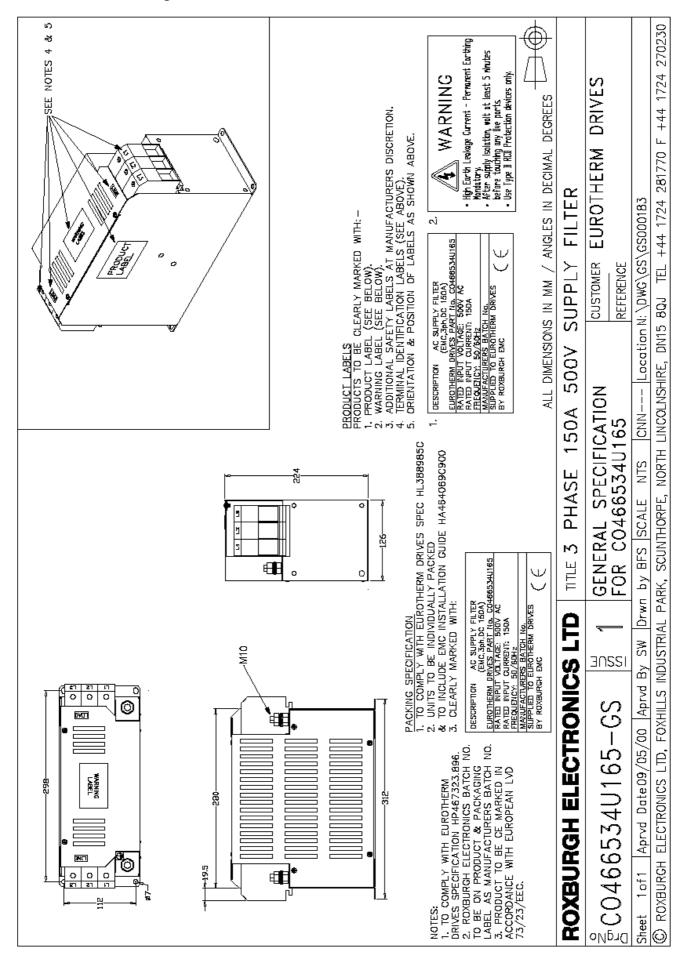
Filter Mounting Details, Part No. CO466534U165 for Frame 2:165 Amp
